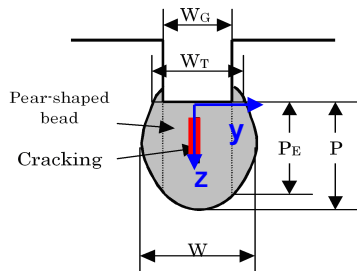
Geometrical parameters of pear-shaped bead cracking.
